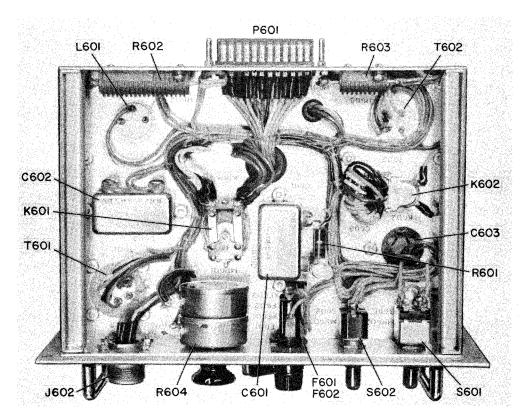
Adapter, Control, Panel and Chassis Assembly, Top View
